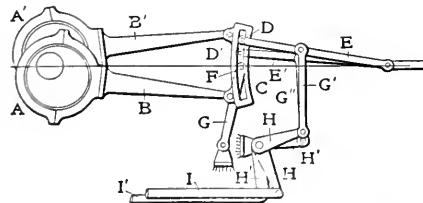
POLENCEAU REVERSING AND CUTOFF GEAR
